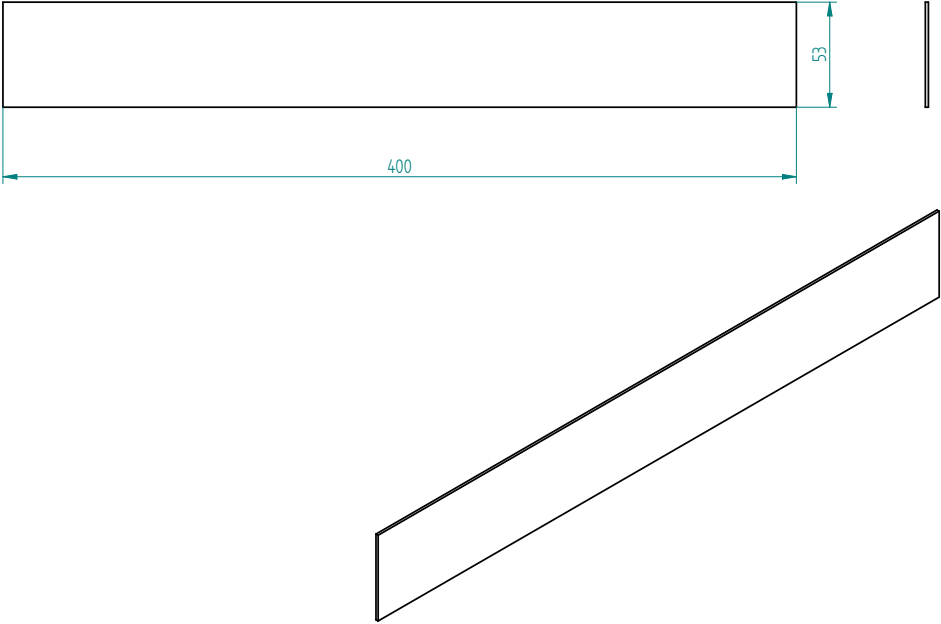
Shaped part : sandpaper for perpendicular tool
